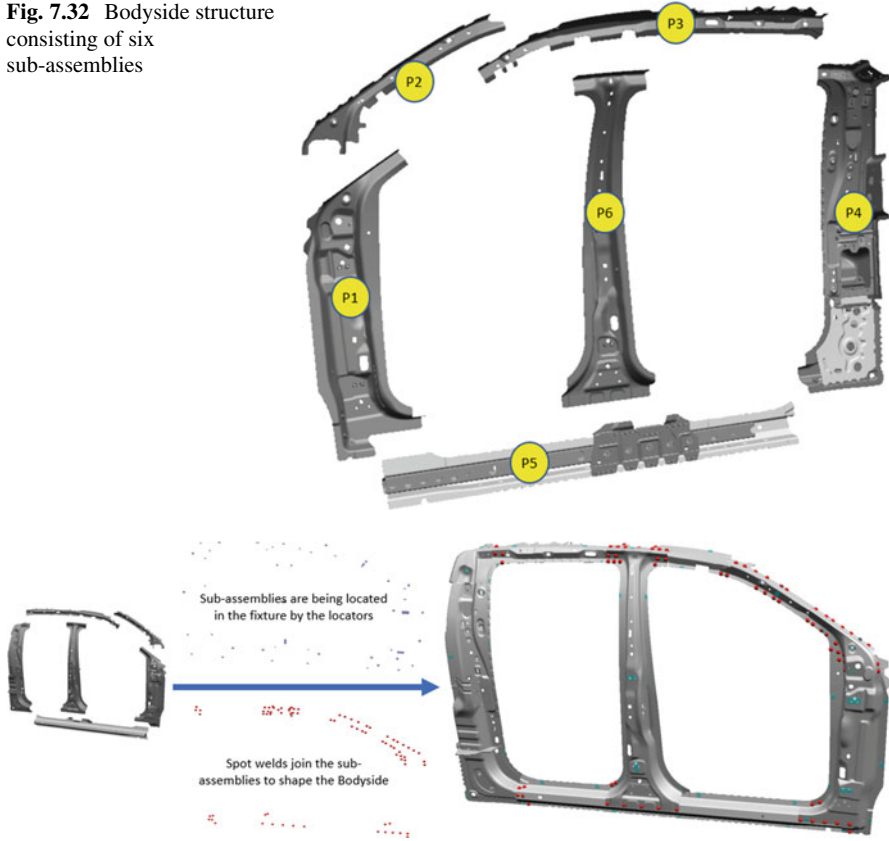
Bodyside assembly with 70 spot welds
